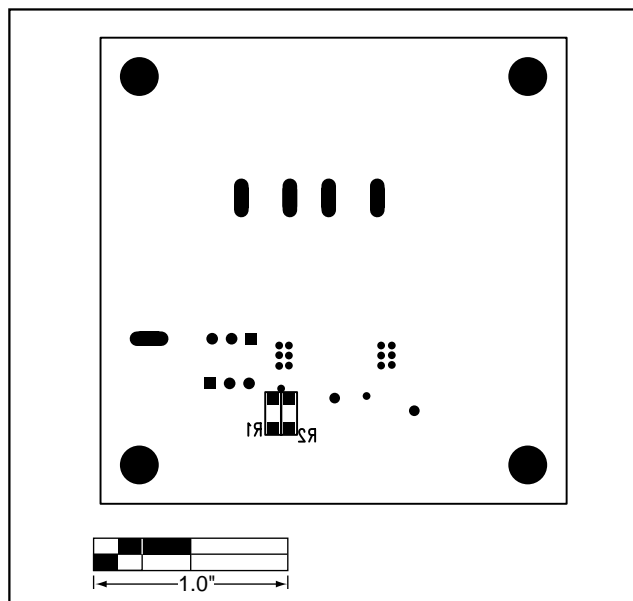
MAX1623 EV Kit Component Placement Guide—Solder Side
